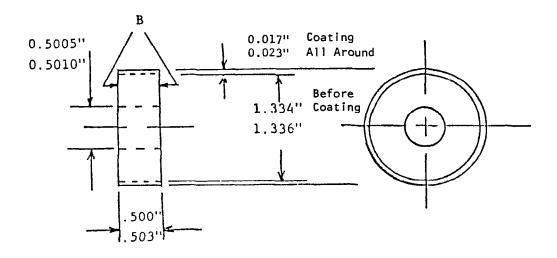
Ring specimen for NASA line-contact rub shoe wear test machine.
